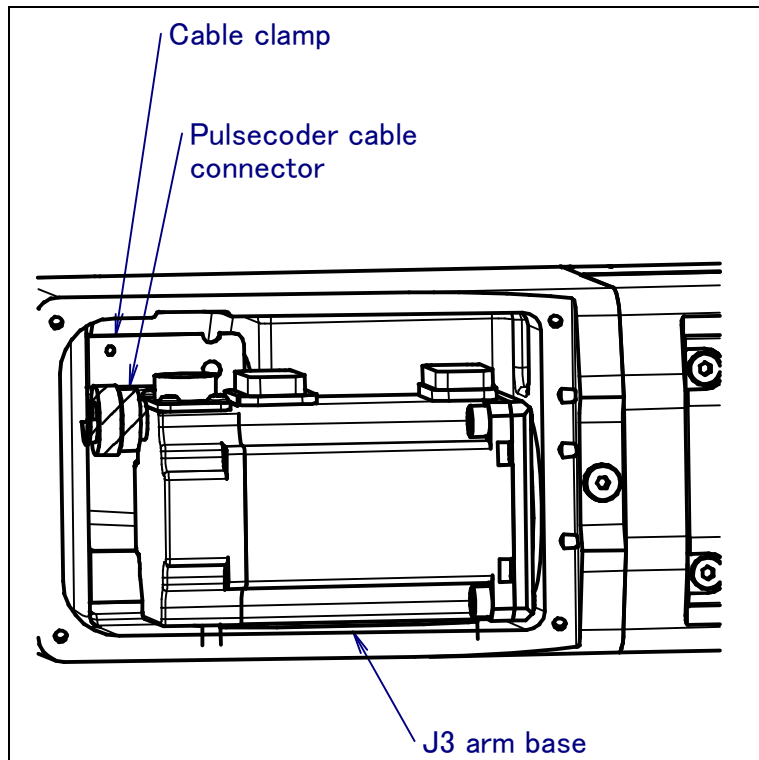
(g) Replacing cable kit (J3 arm part 3)
